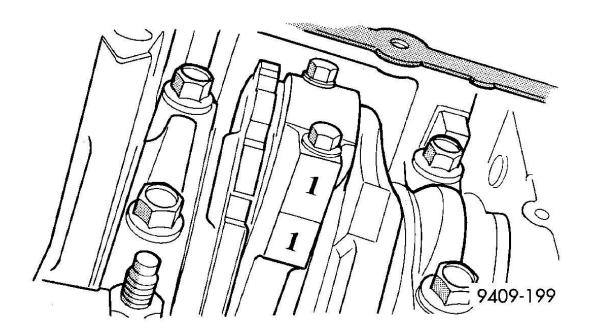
Marking Connecting Rod & Bearing Cap Position Courtesy of CHRYSLER LLC
